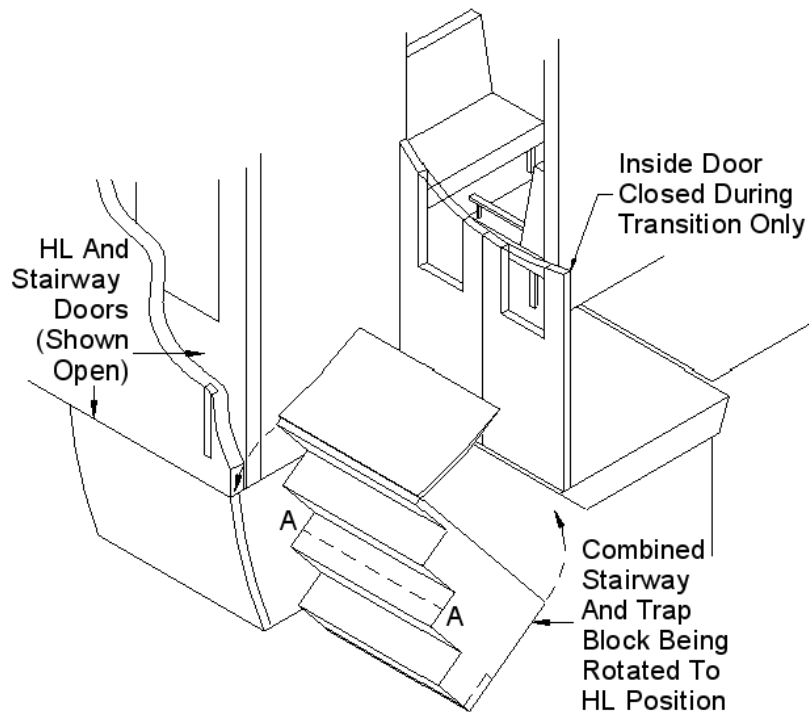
New Entranceway Design in Car having no Passenger Compartment Door, showing Bi-Fold Door at Side of Car's Center Aisle.
